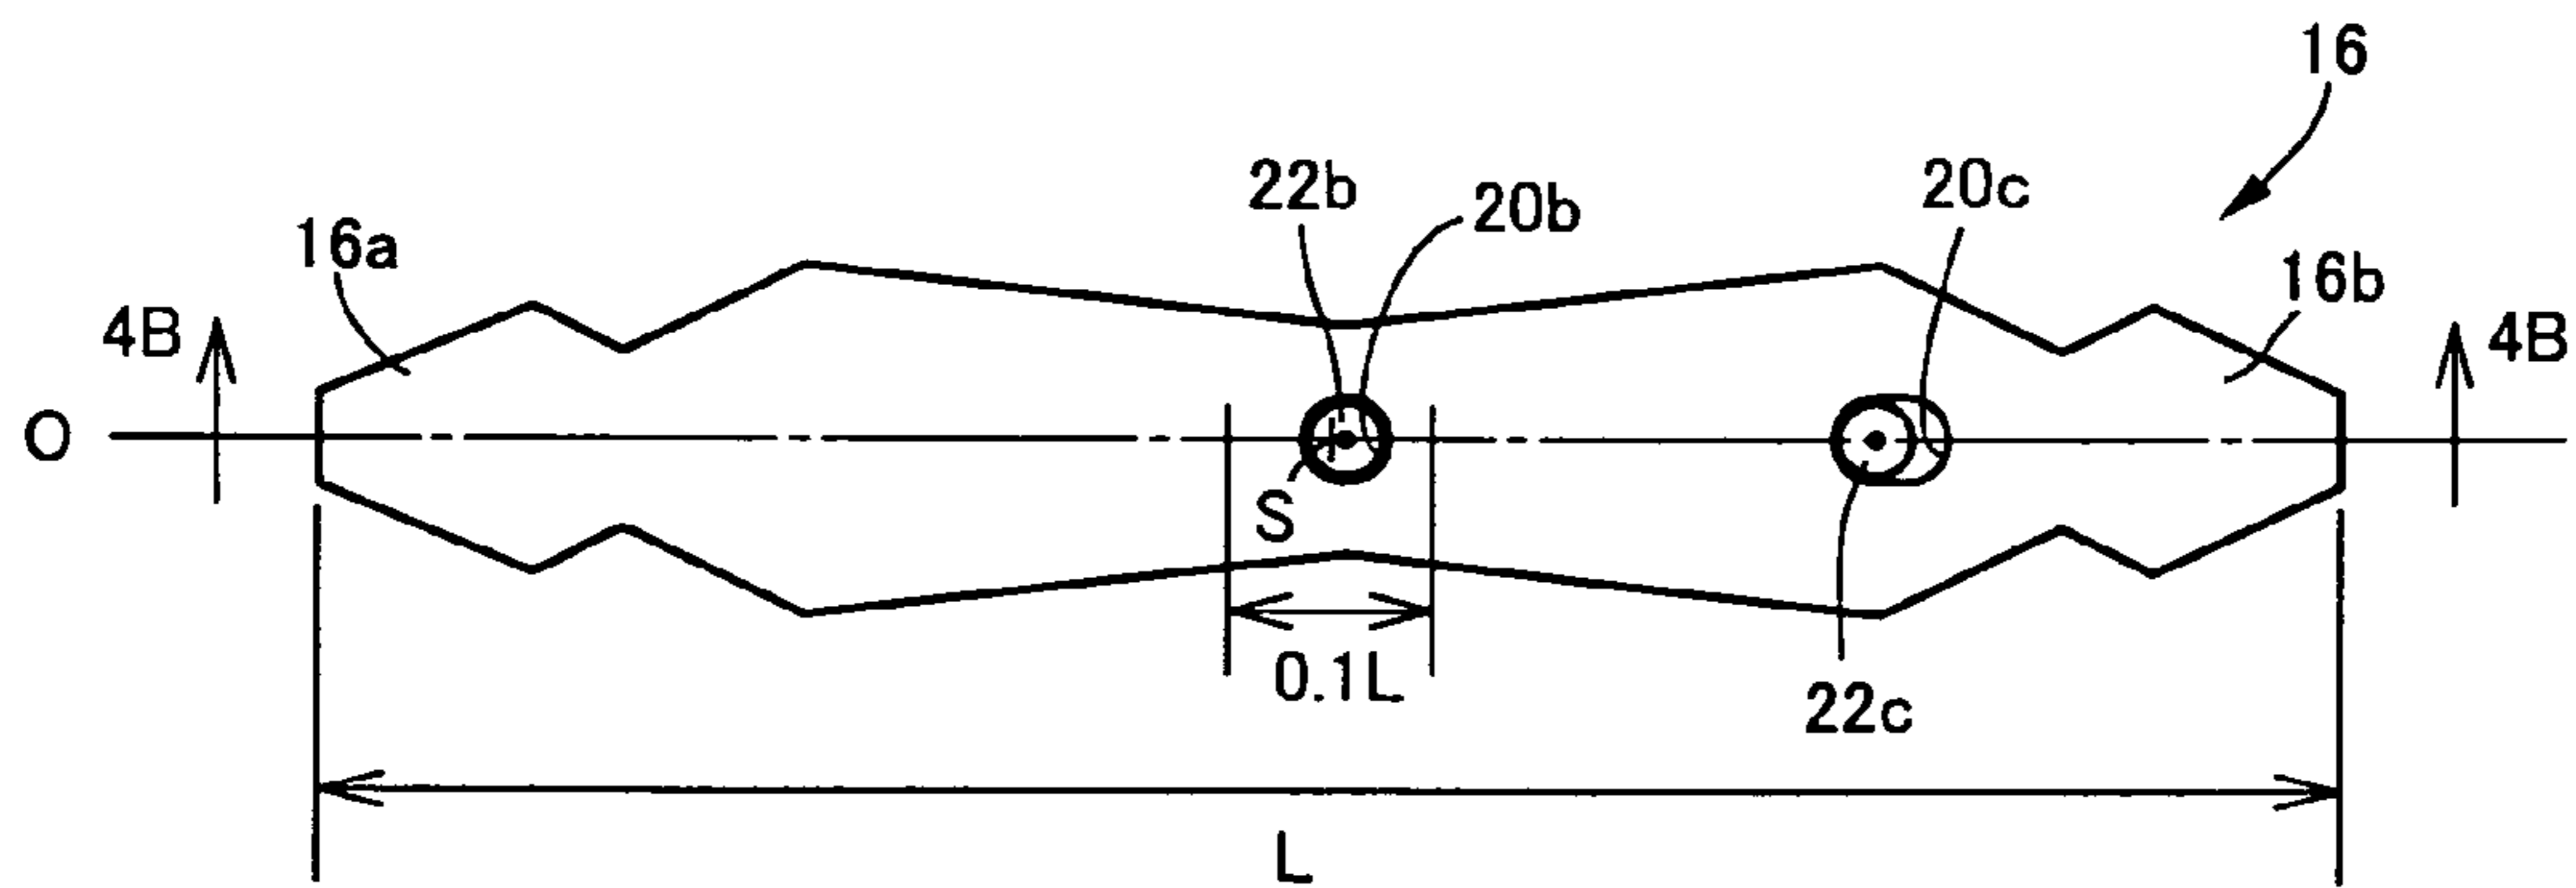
PLATE-SHAPED WORKPIECE POSITIONING STRUCTURE FOR HOT PRESS FORMING
